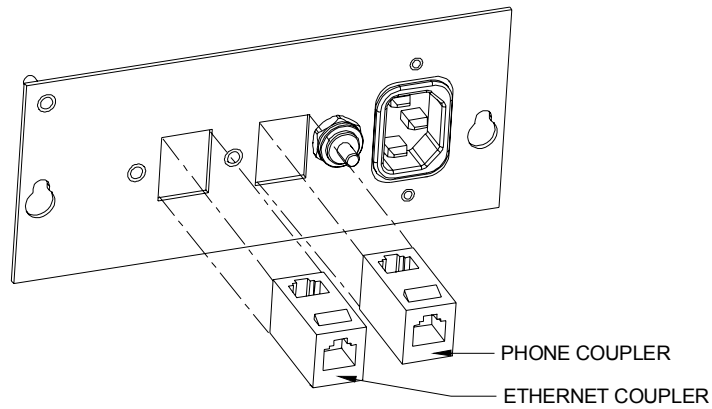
MAXX UPRIGHT - POWER ENTRY ASSEMBLY
